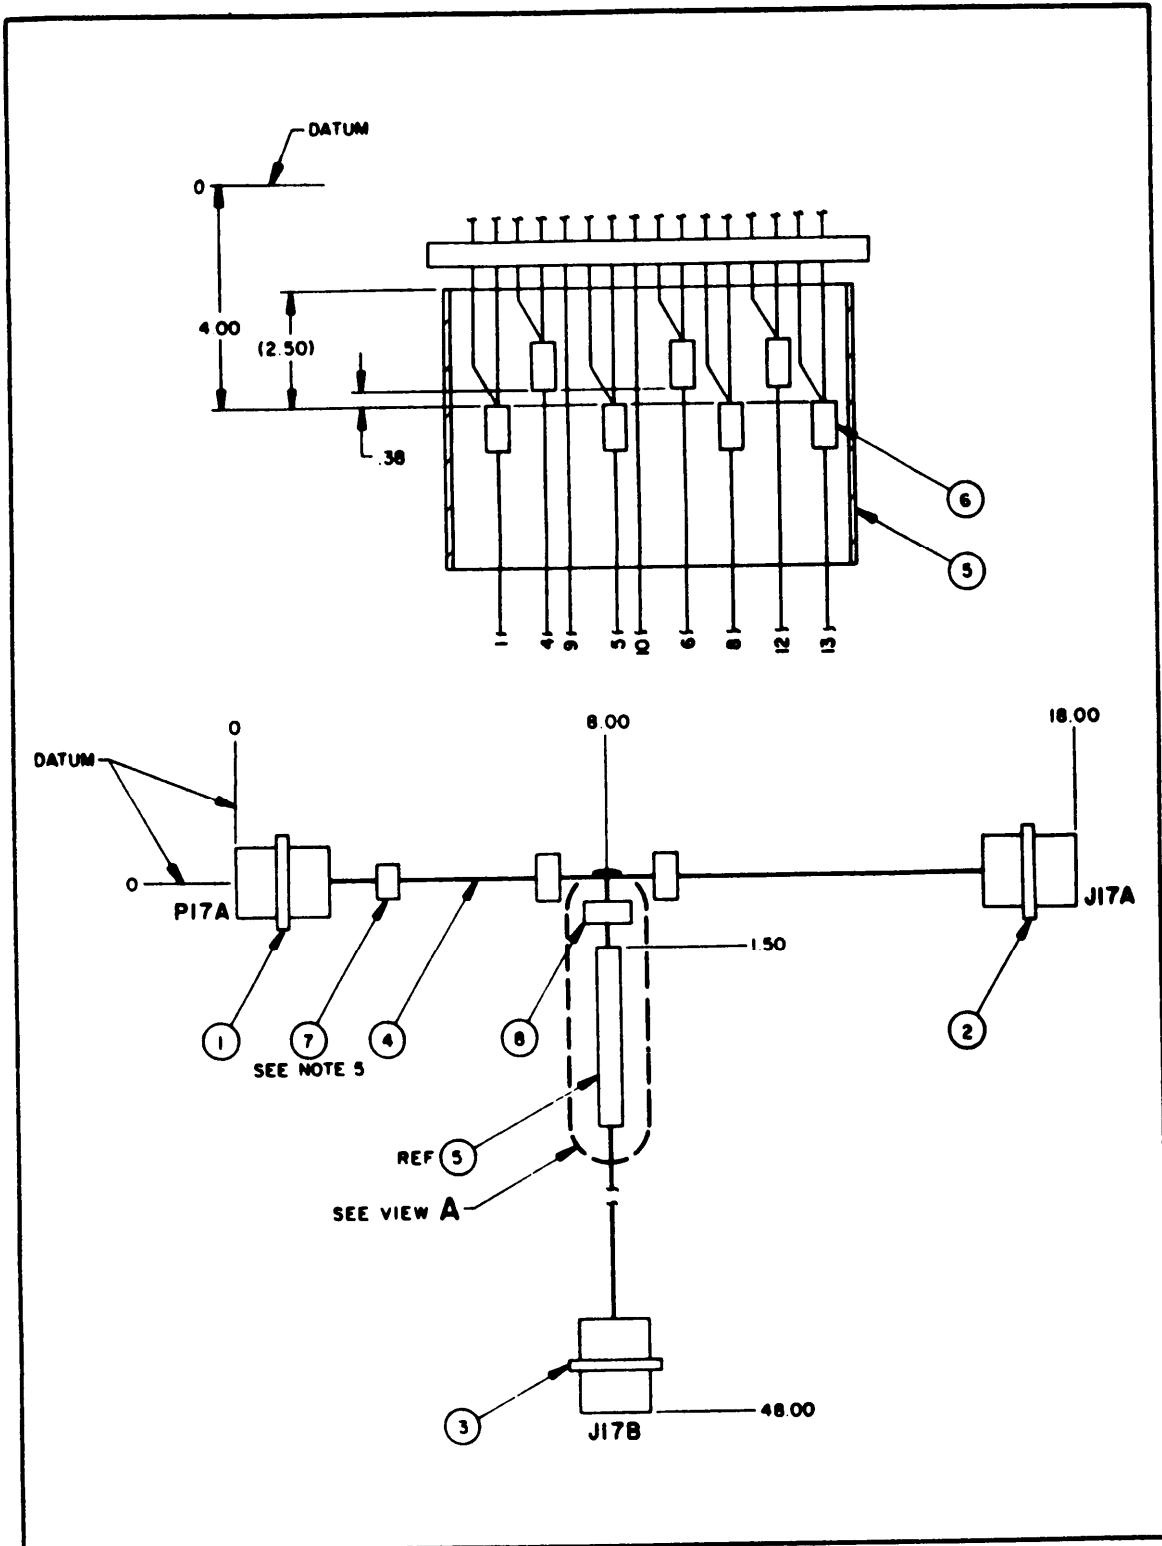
Breakout Cable (Sheet 1 of 2)
